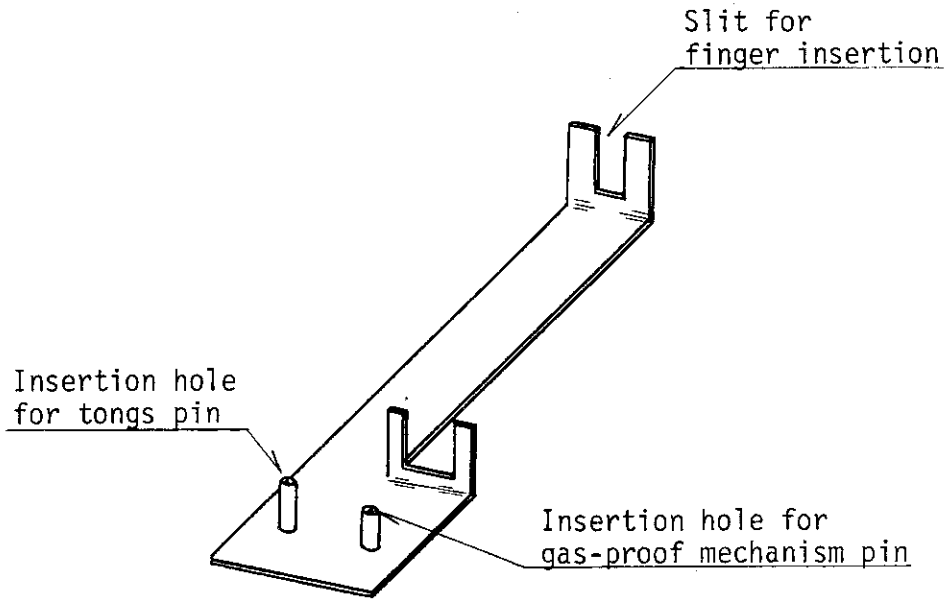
Tong exchange device for the type A 15 ball-socket tong manipulator
